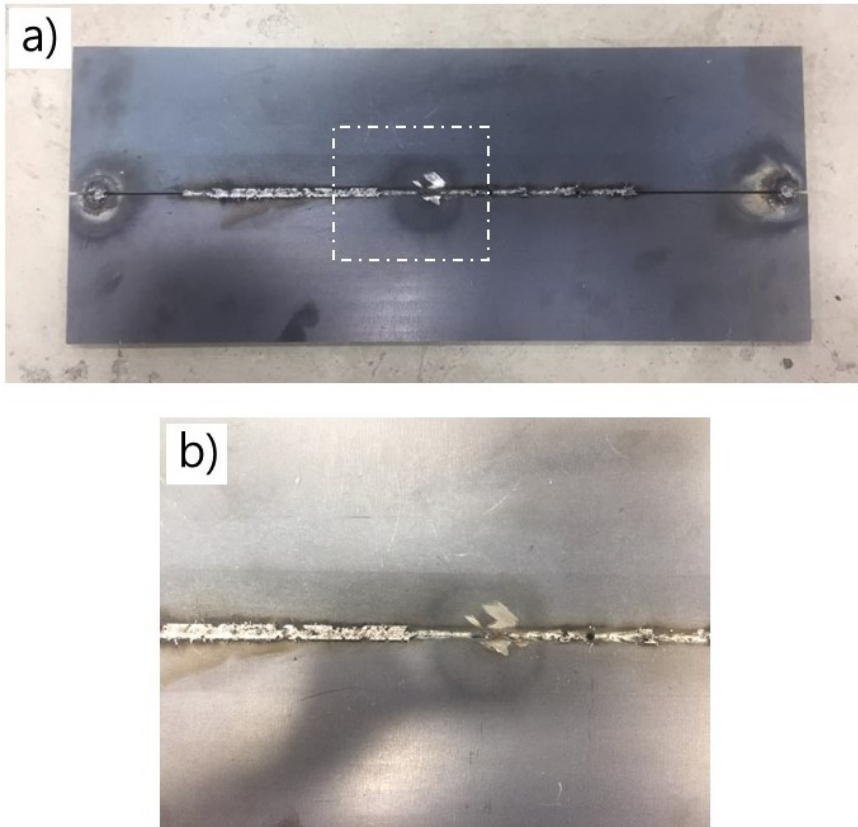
Good weld achieved from the experiments a) being the welded sample and b) is the closer view.
